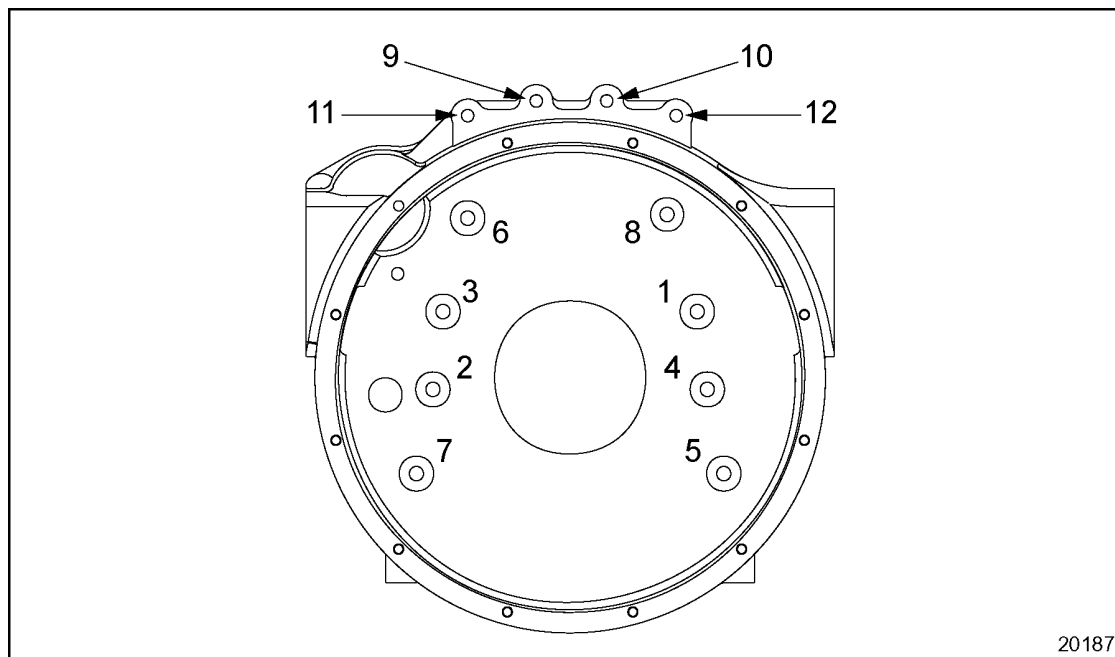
Flywheel Housing Bolt Torque Sequence
